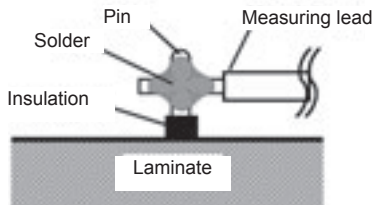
Soldering the measuring leads to the pins
